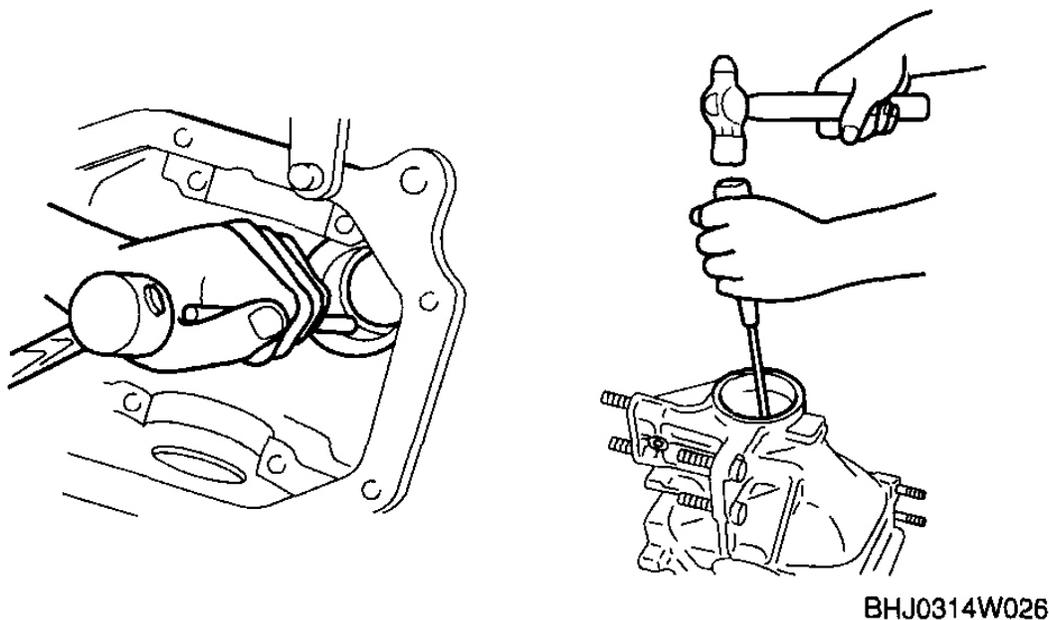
Removing Bearing Outer Race By Lightly Tapping Edge Of Bearing Outer Race Using Flathead Screwdriver
